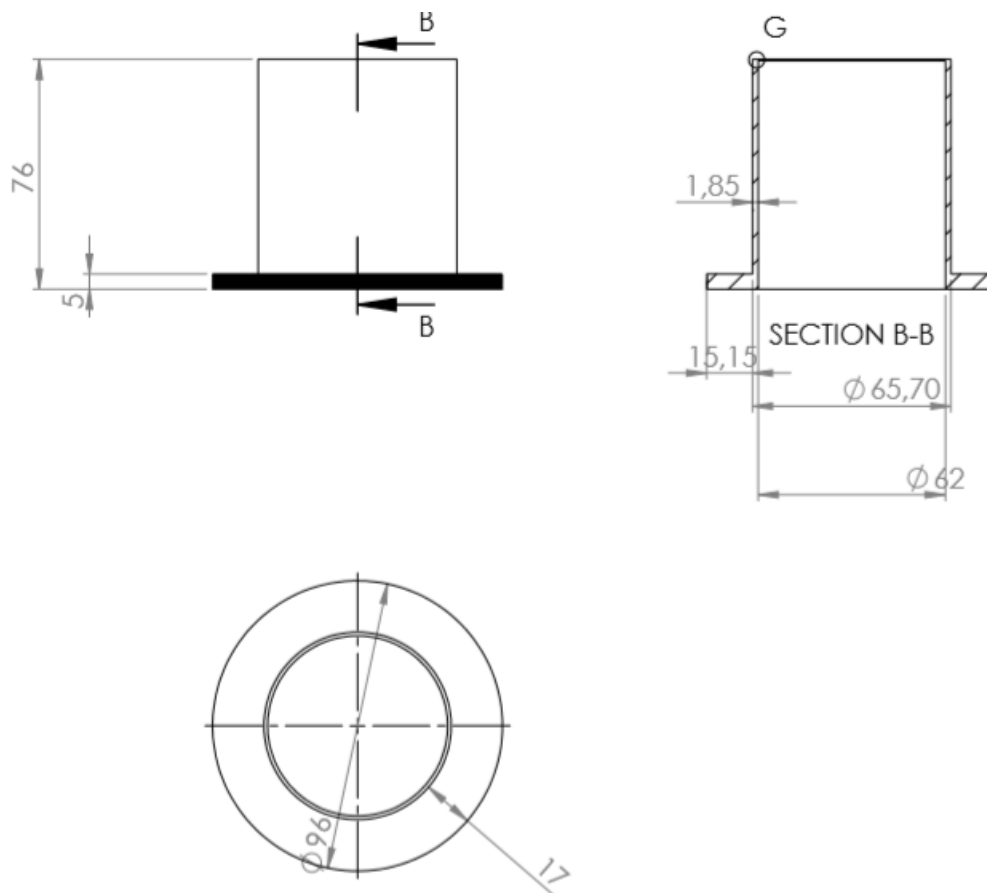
Technical draw of the injector – part 3 (dimensions are in mm).
